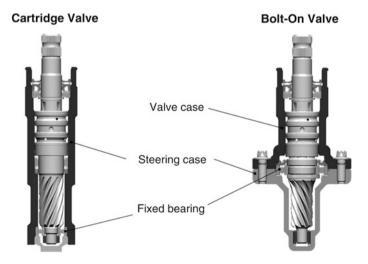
Cartridge valve (on the *left*) and bolt-on valve (on the *right*)
